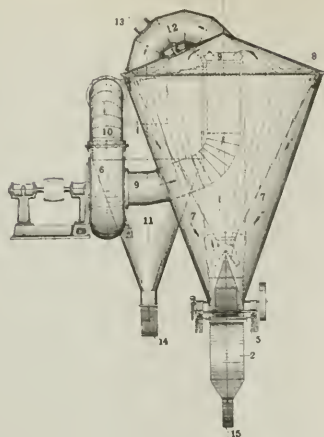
SECTIONAL VIEW OF VACUUM SEPARATOR
